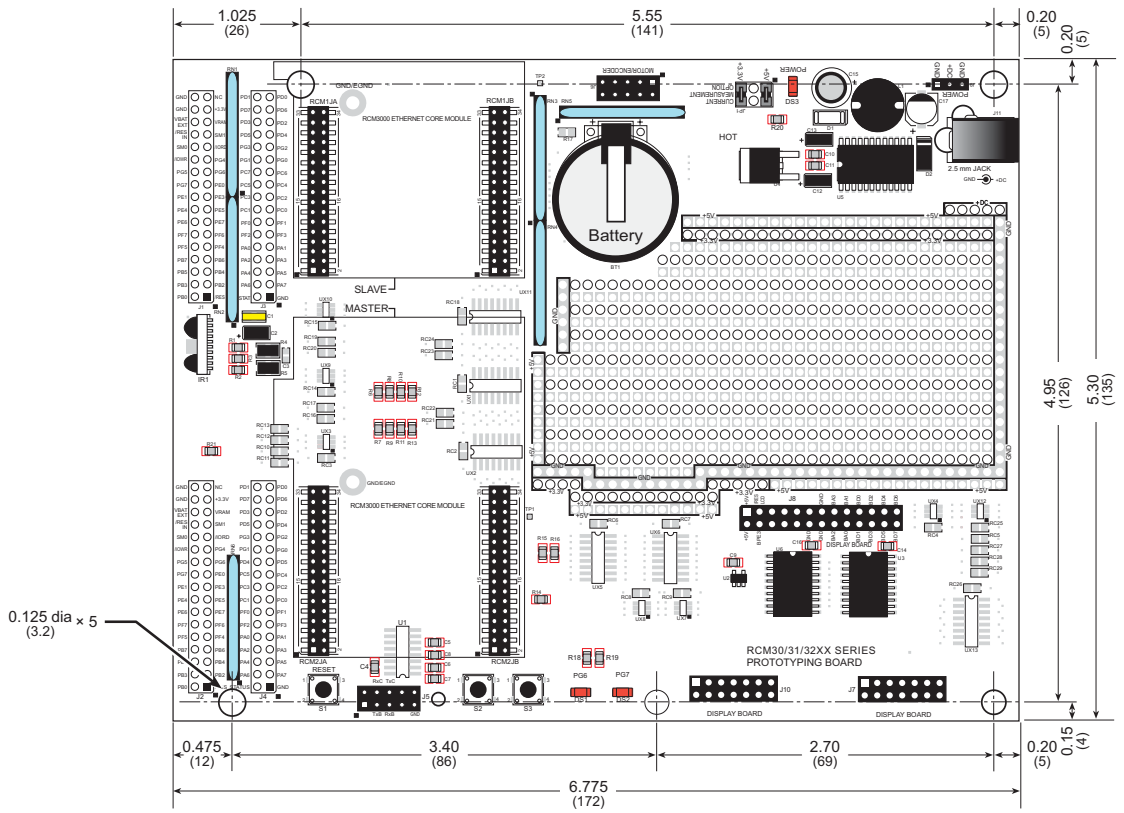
RCM30/31/32XX Prototyping Board Dimensions
